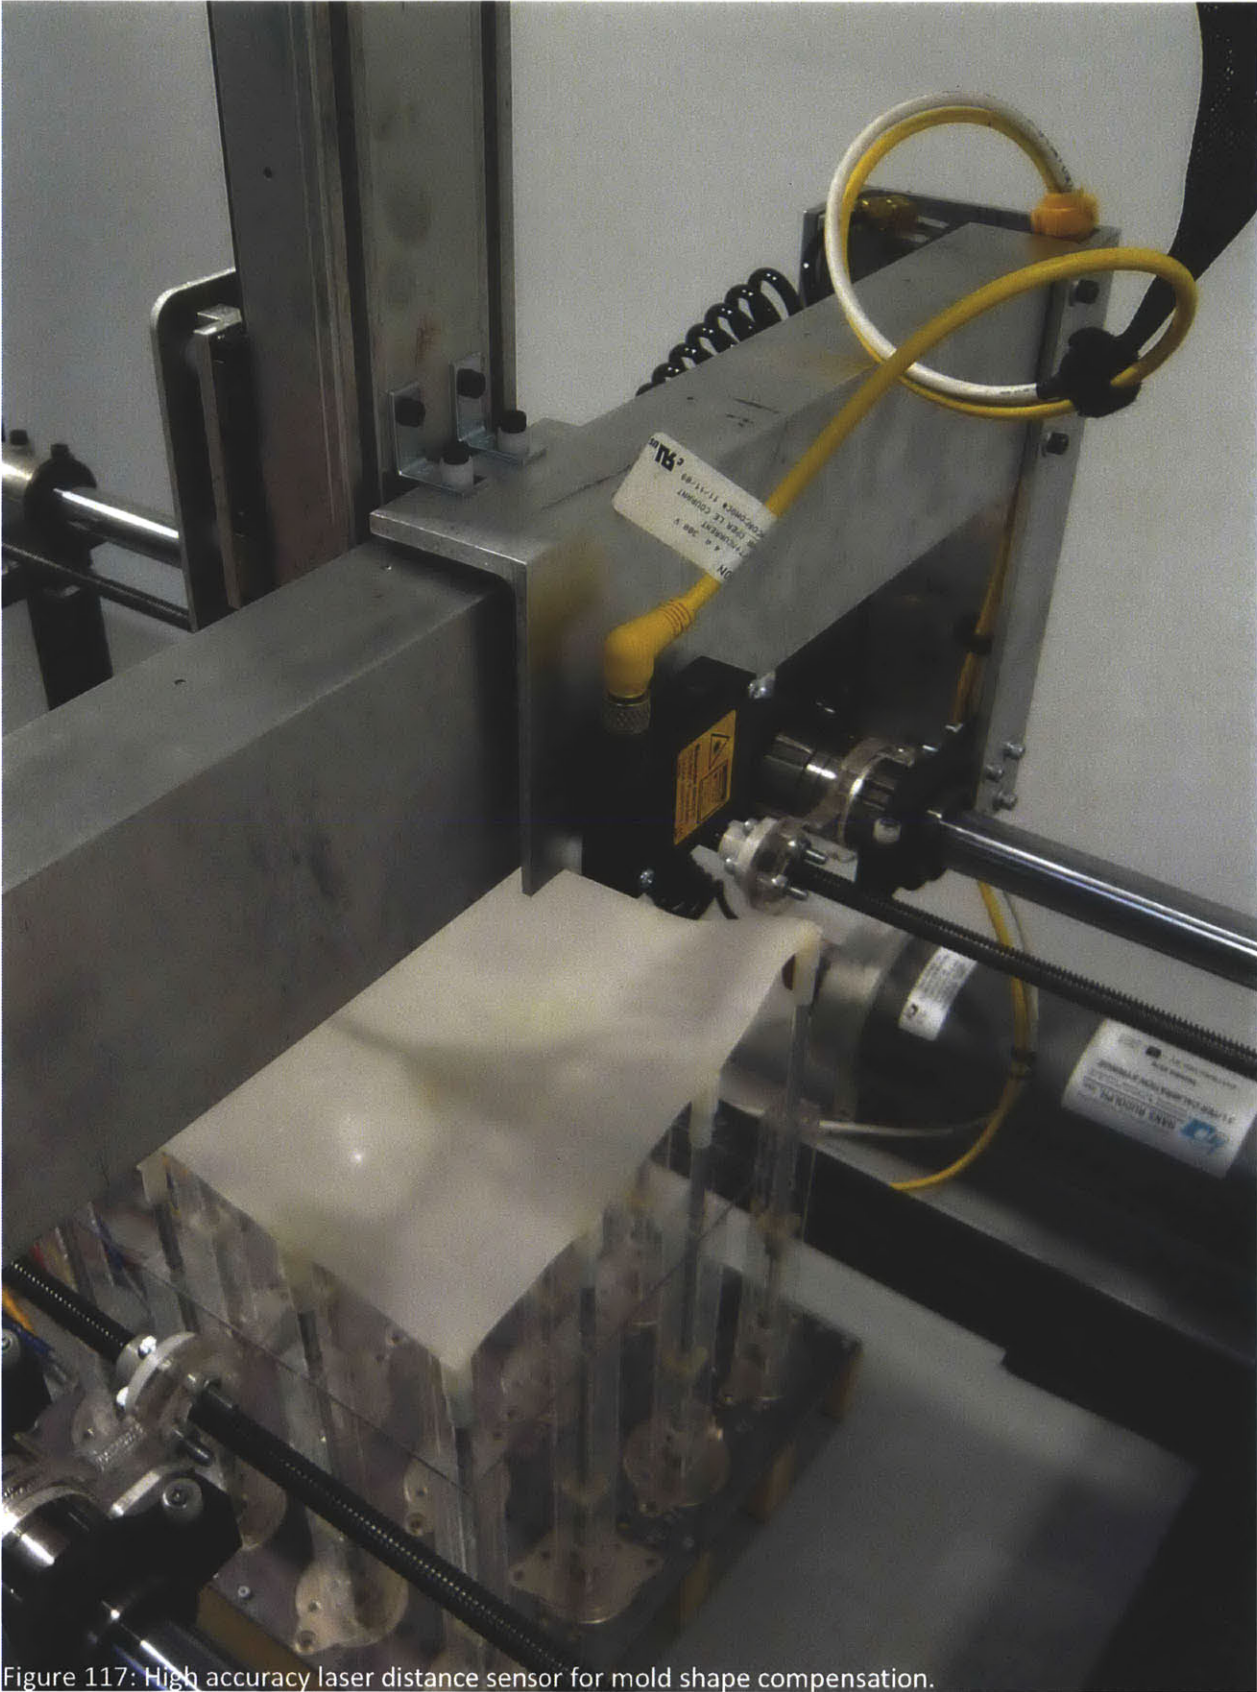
High accuracy laser distance sensor for mold shape compensation.
